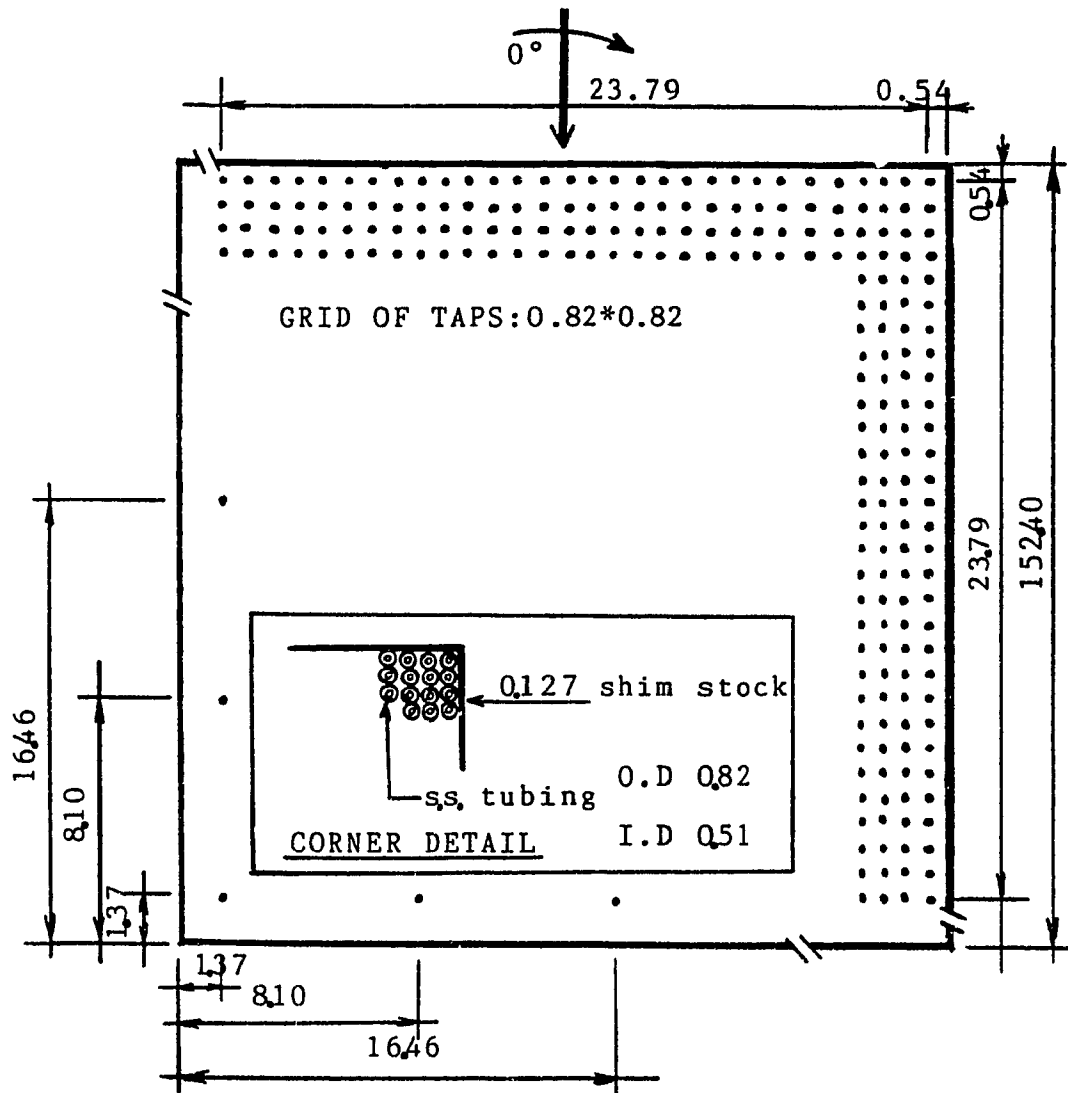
DETAILED SKETCH OF THE PRESSURE TAP ASSEMBLY
